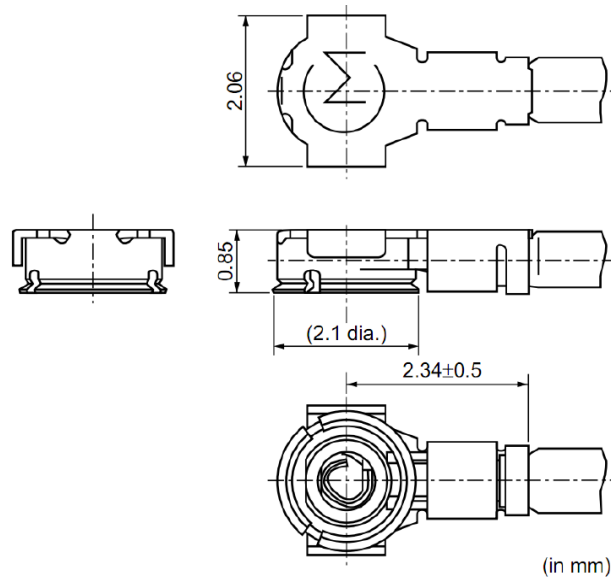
Dimensions of Mated Plugs Using $\varnothing 0.81$ mm Coaxial Cables (Unit: mm)
